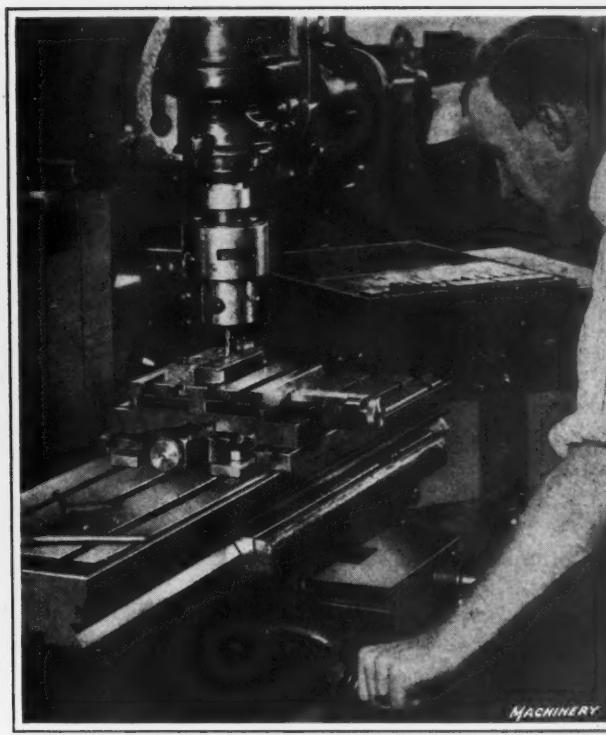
Boring Holes on a Vertical Milling Machine, using the Compound Slide
